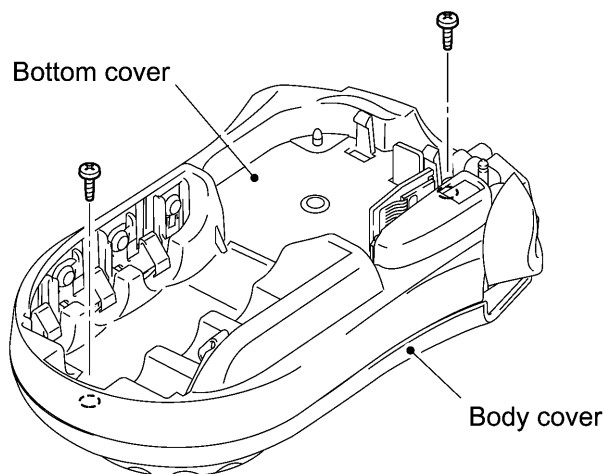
Securing the Bottom Cover to the Body Cover
